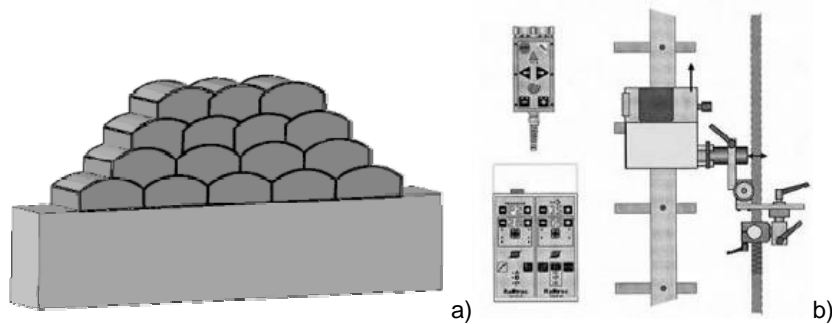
a) Welding sequence, b) Railtrac FW1000 System
